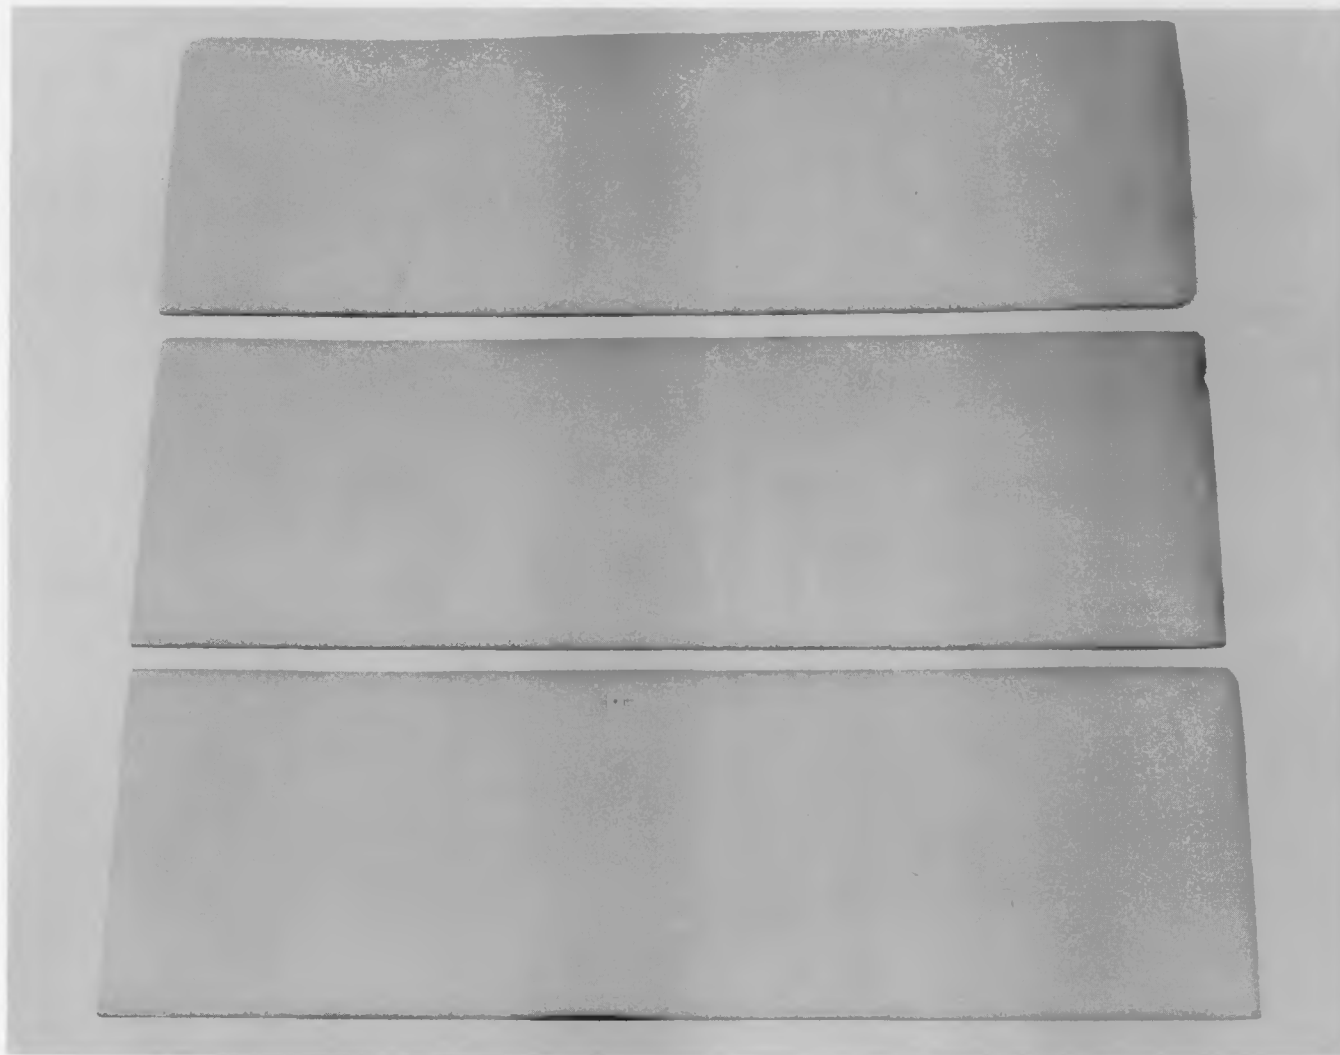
Sintered pieces (4-1/2 in. x 15 in.) of powder-rolled strip, edges sanded before sintering.
